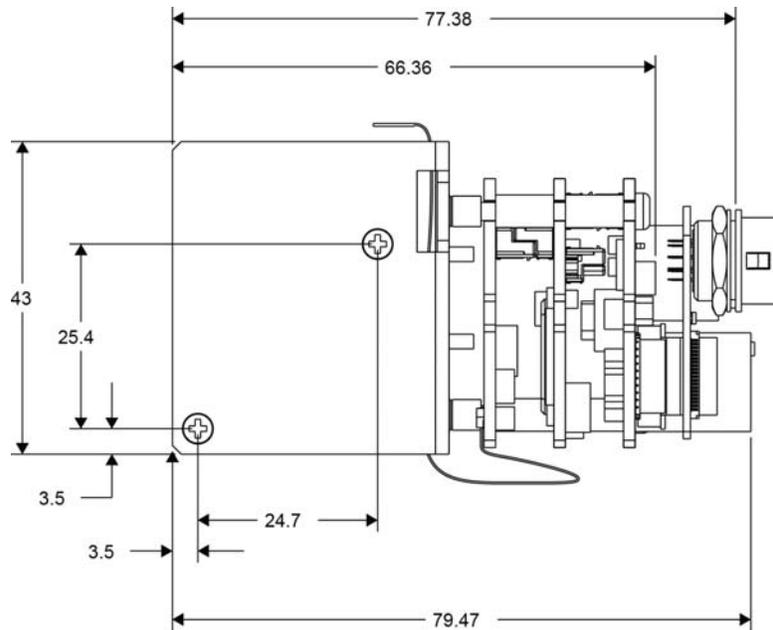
SB-GigE-EV7520A GigE PHY Board Front with Dimensions
